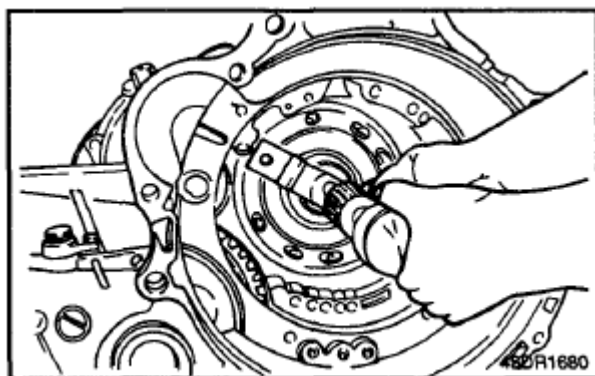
Identifying Special Tool (09453-21310) To Center Support
